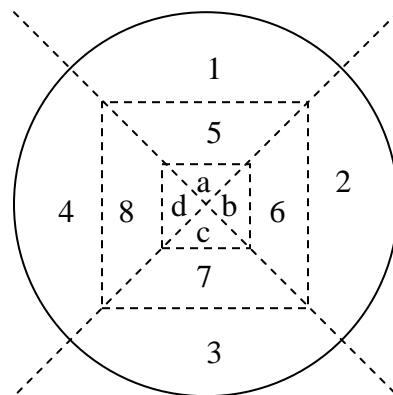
Cutting a coconut trunk to make 8 boards and 4 triangular pieces (transverse view).
